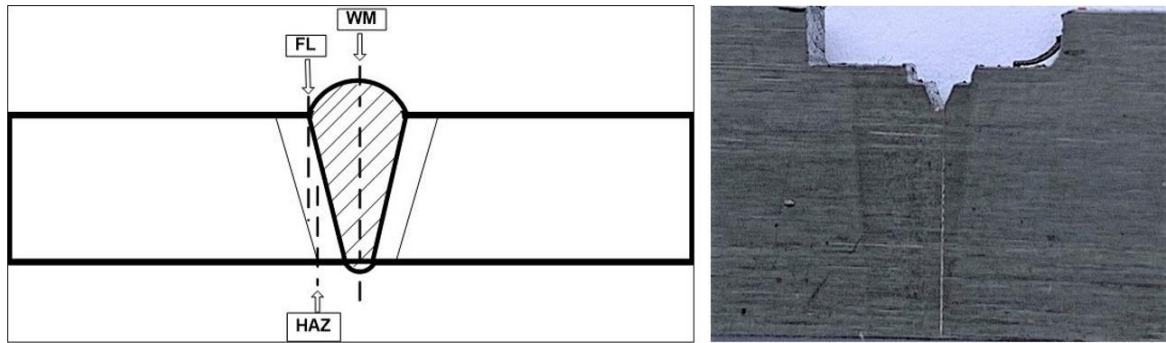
Notch locations and crack paths in the welded joints.
